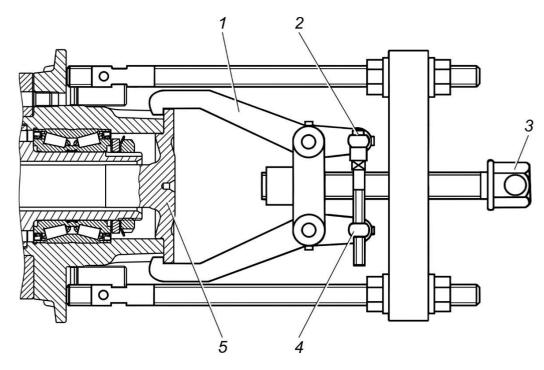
Rear axle shaft removal: 1 – legs; 2 – bolt; 3 – screw; 4 – axle; 5 – axle shaft
